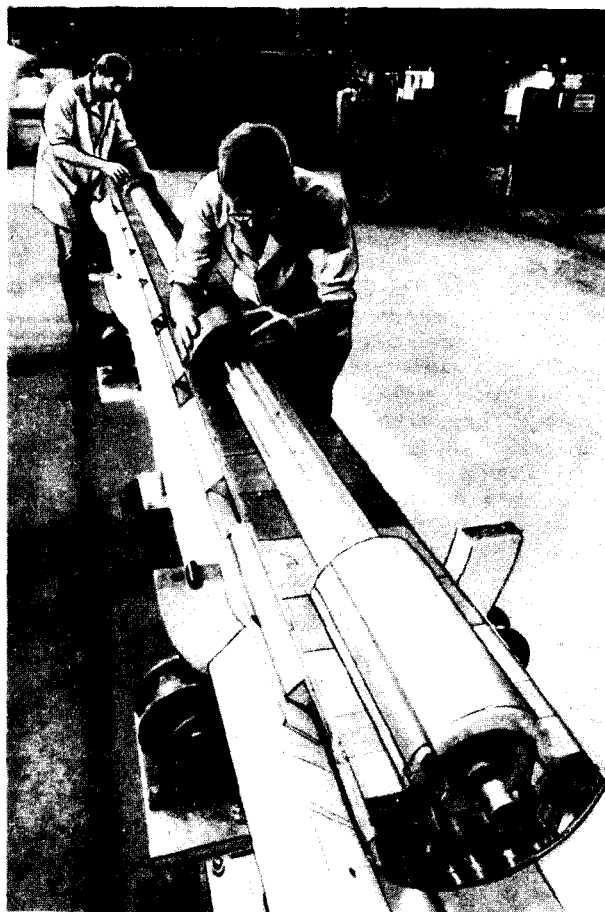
Collared coil installed in bottom yoke half, with top yoke modules being installed. Note larger diameter collars in magnet ends to accommodate flared coil ends.
